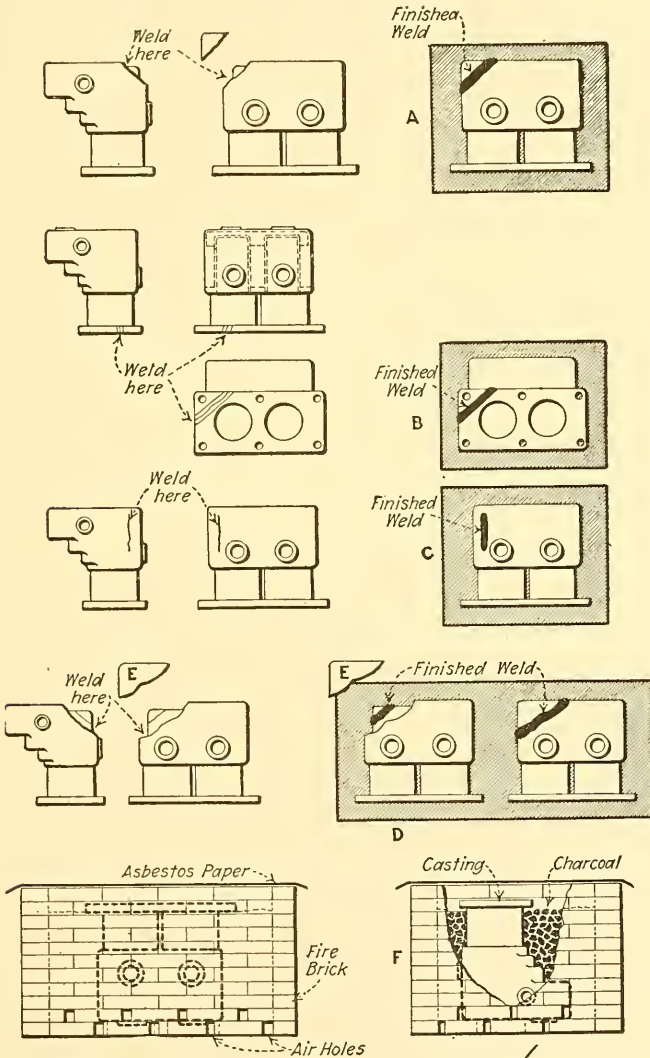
Broken Motor Cylinder Block and Preheating Furnace.
